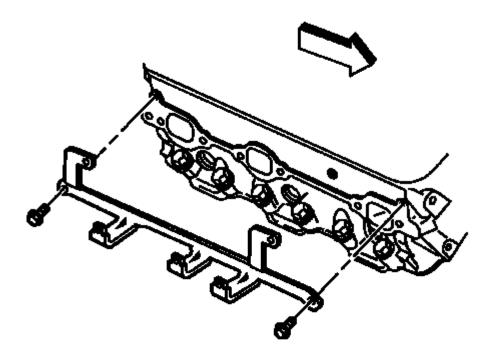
View Of Spark Plug Wire Support Bolt (Right) Courtesy of GENERAL MOTORS CORP.
